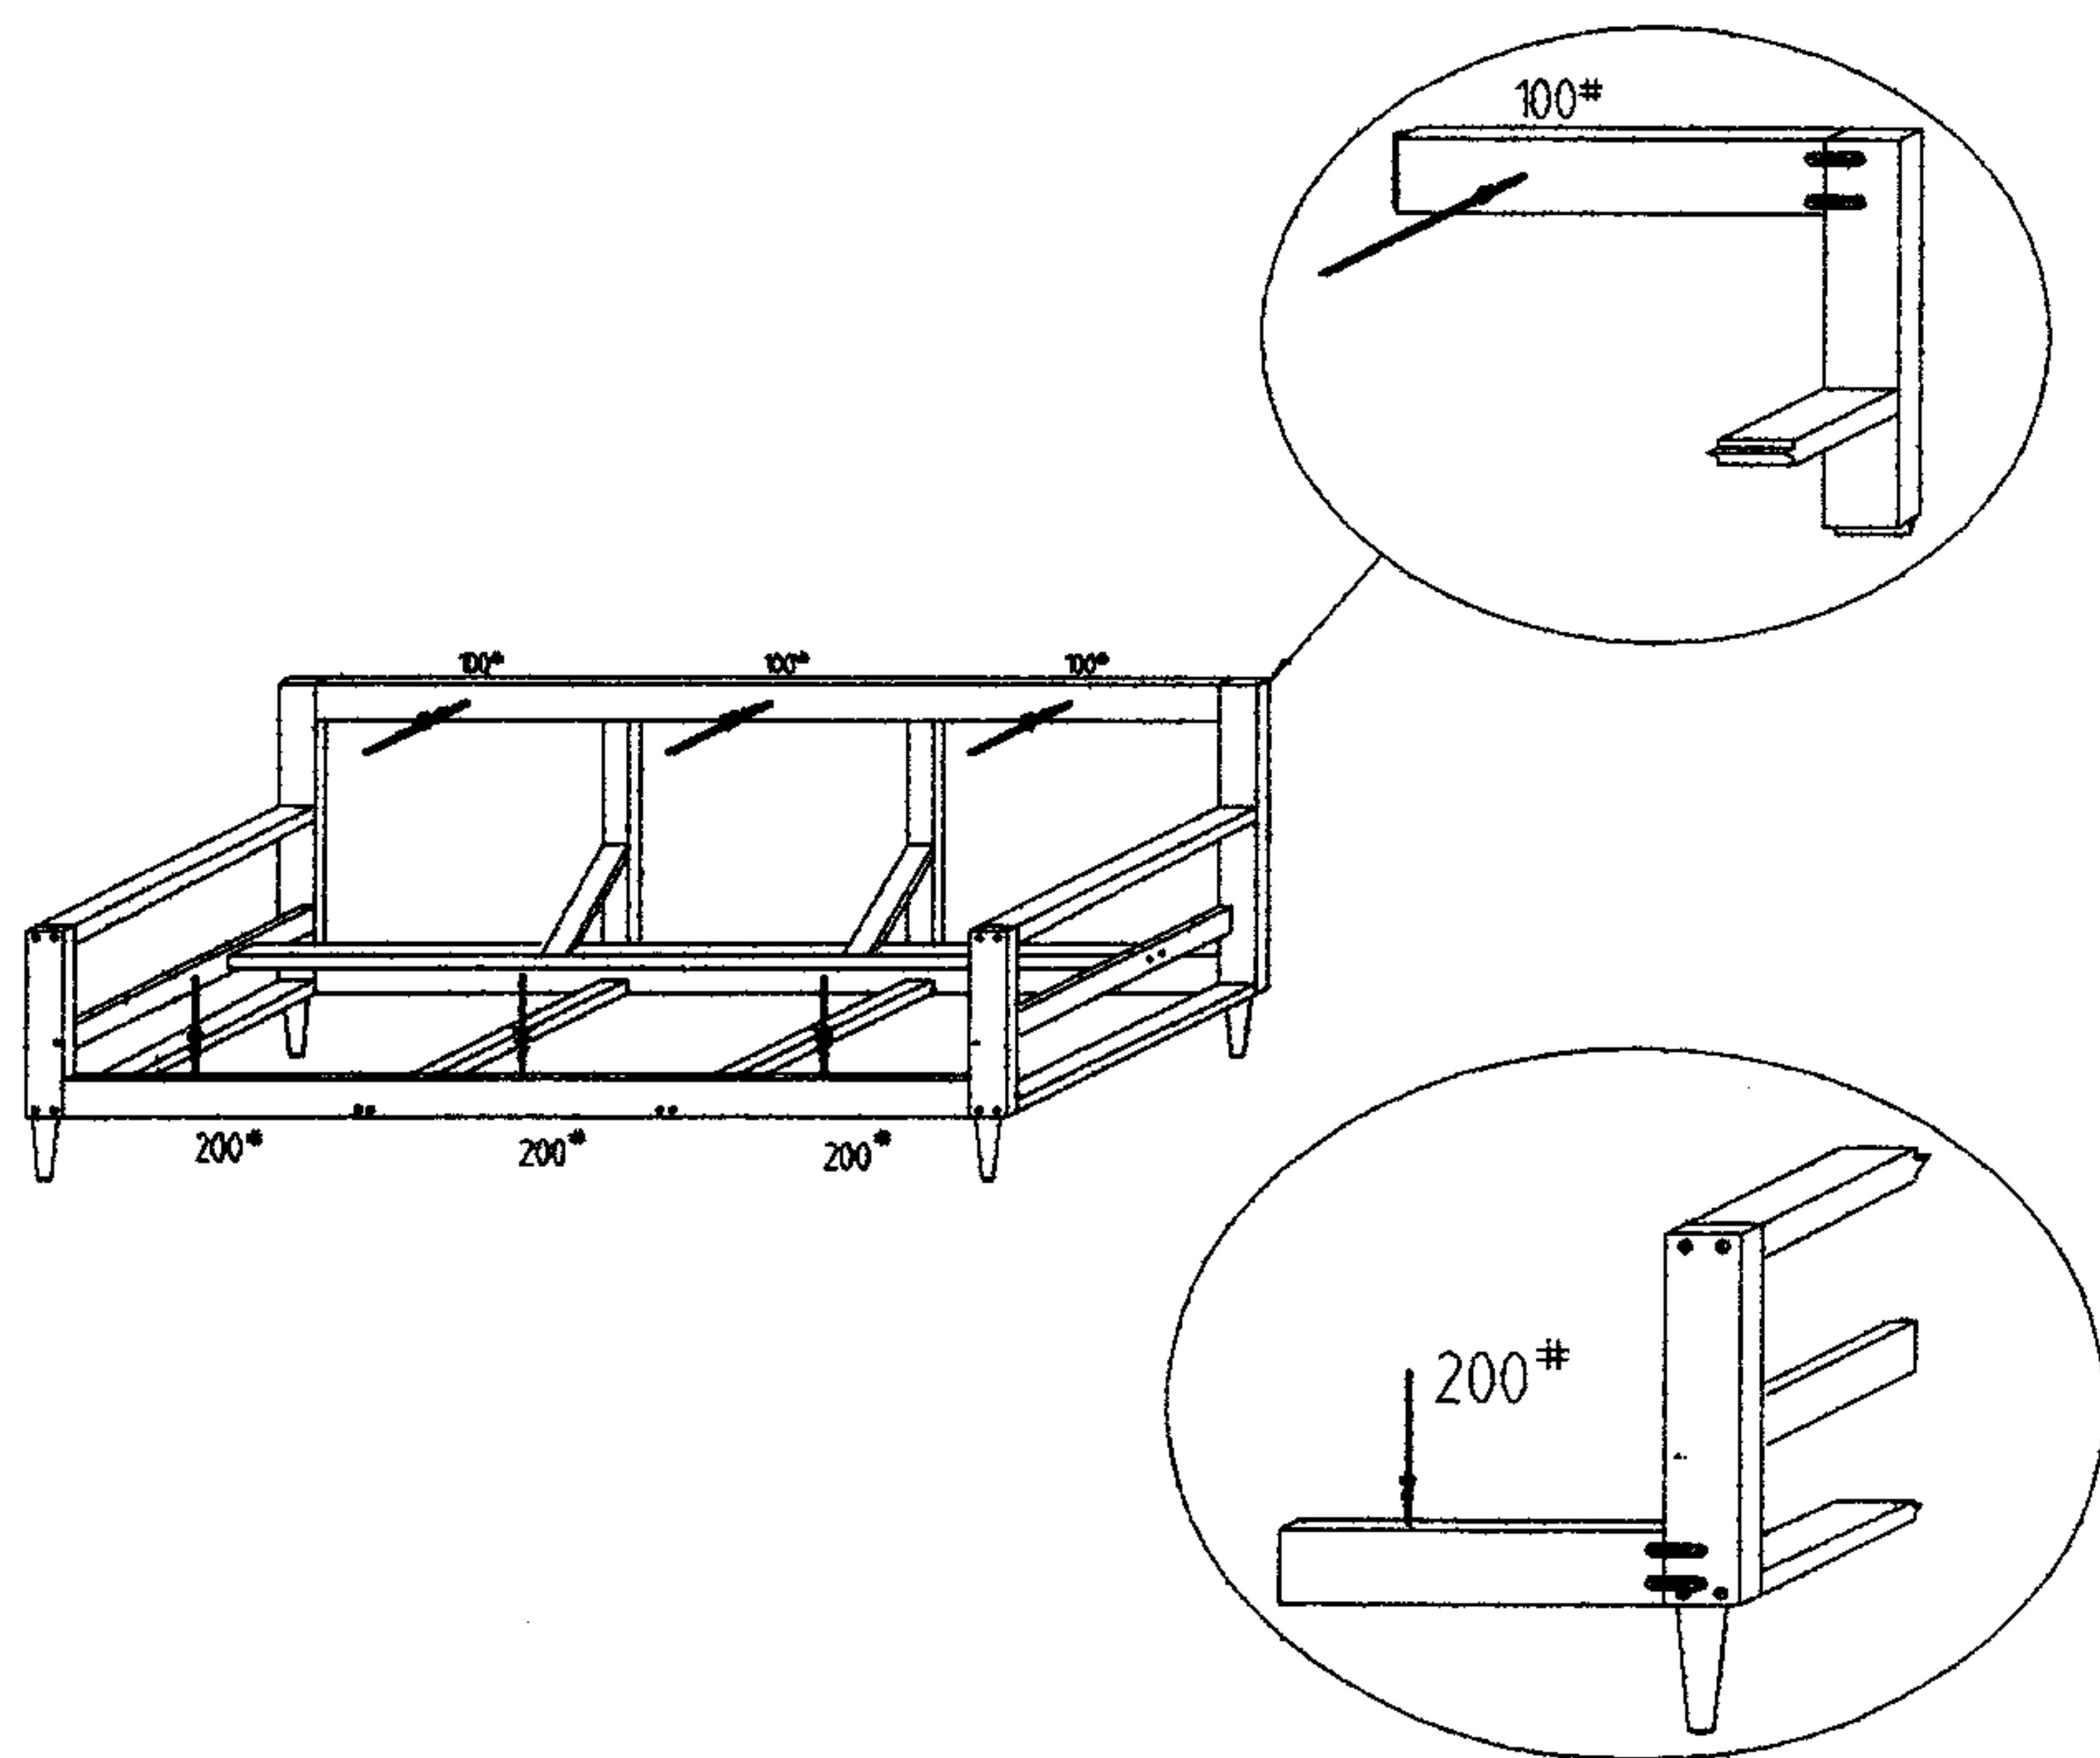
Design of the top rail to back post joint against lateral face loads and the front rail to stump joint against lateral edge loads.
